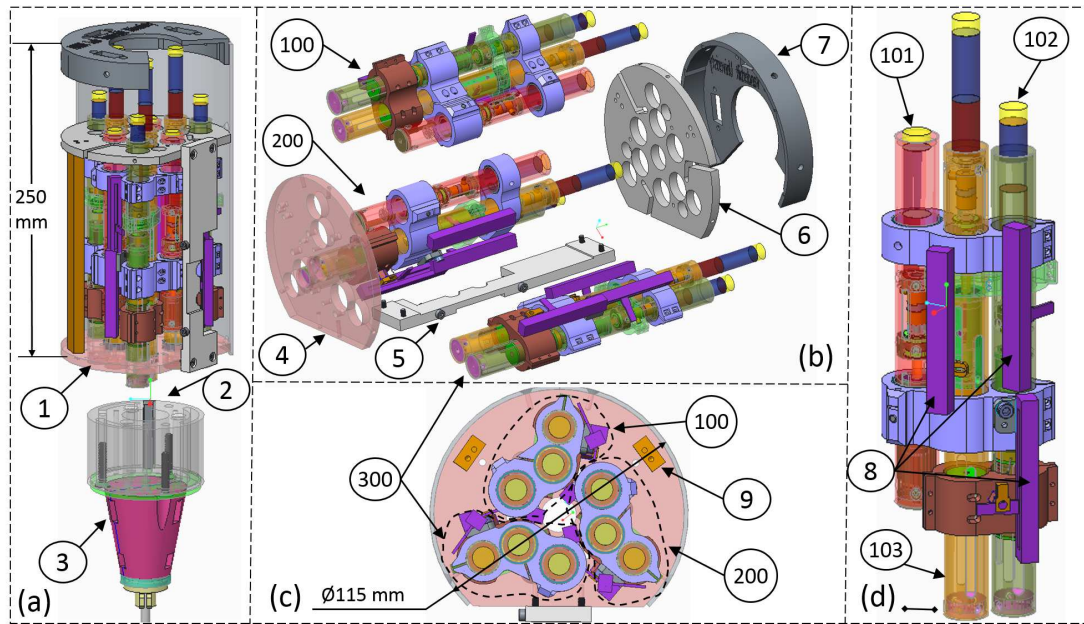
Actuation Unit Exploded view: (a) Assembly showing the actuation unit ①, the detachable actuation interface ②, and the actuation cone ③; (b) Exploded view showing the three backbone actuation modules ⑩①②③, (c) bottom view showing axial symmetry, (d) backbone actuation module assembly
